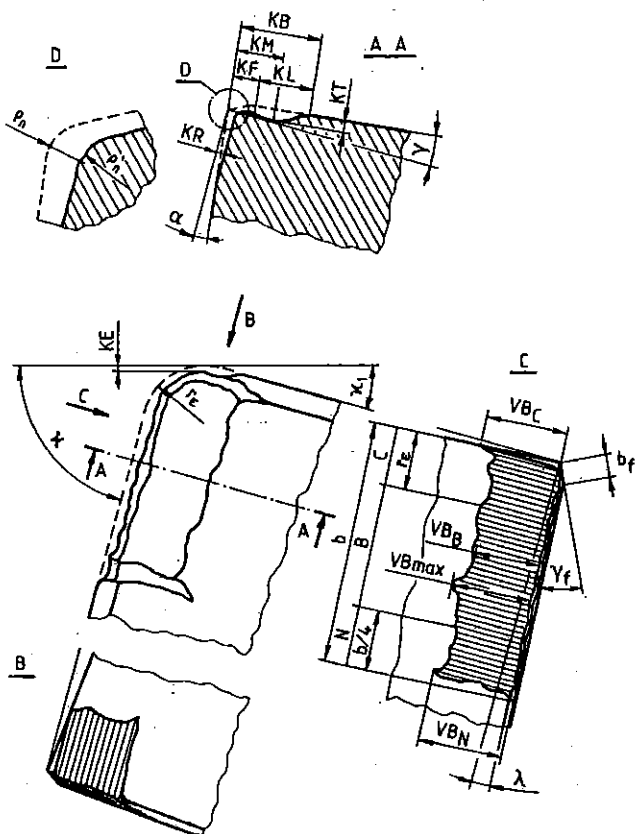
Geometry indicators of the cutting coter wear during machining with turning [1,3]
